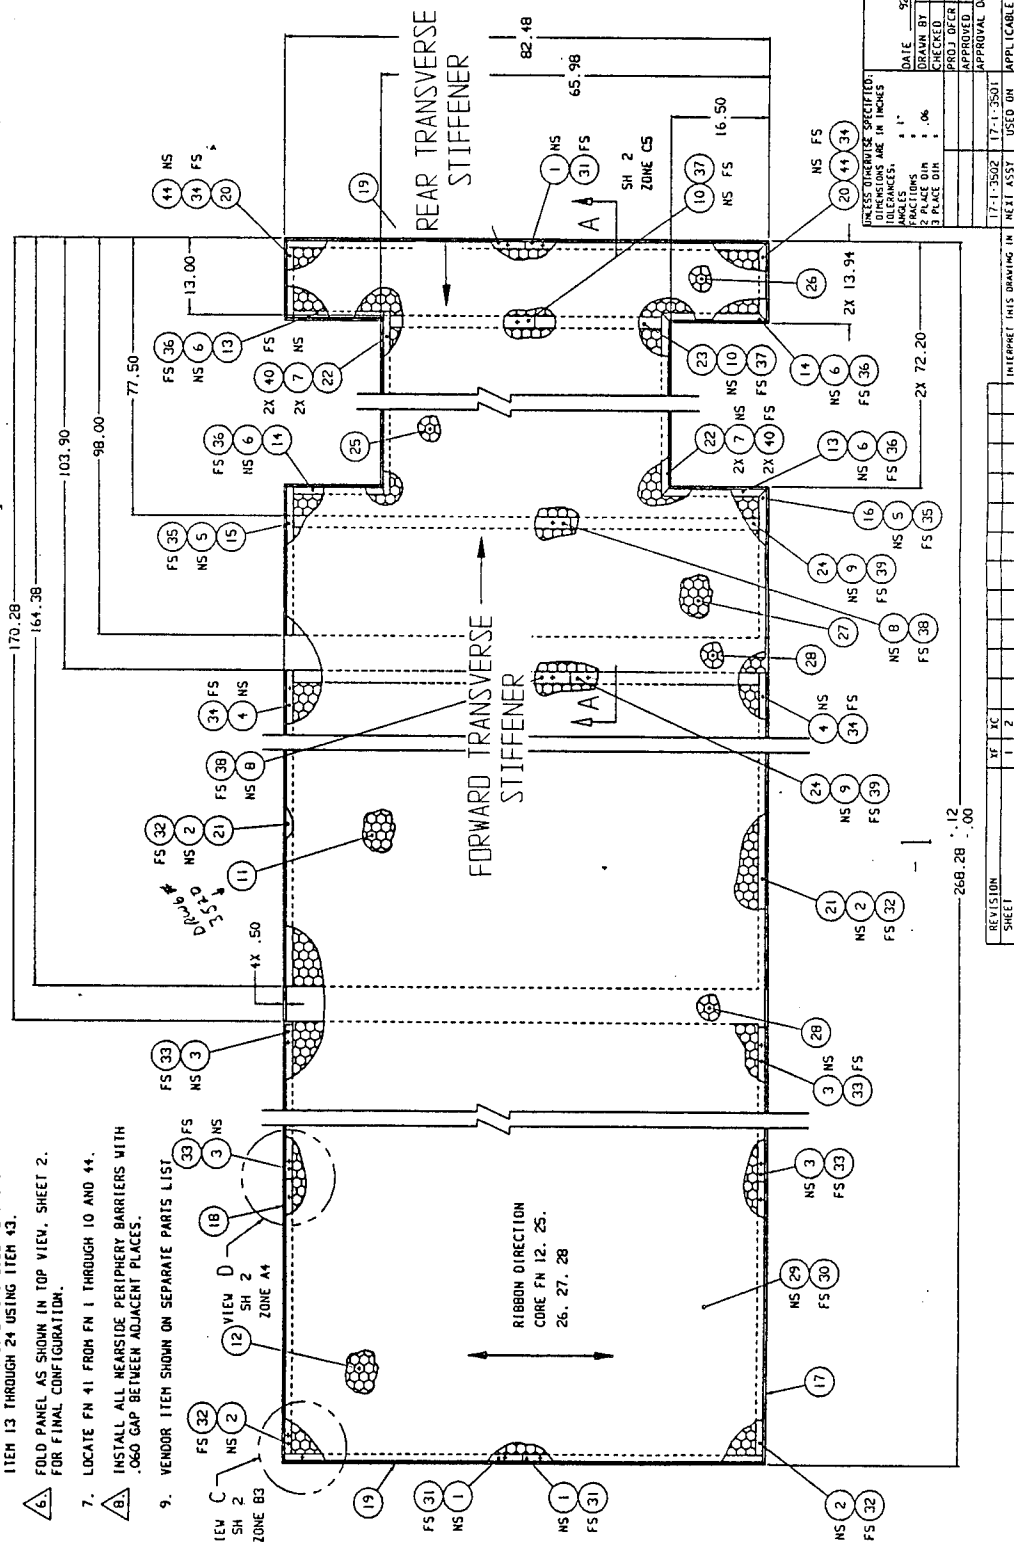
SICPS Floor Panel w/ Transverse Box Beams Shown
